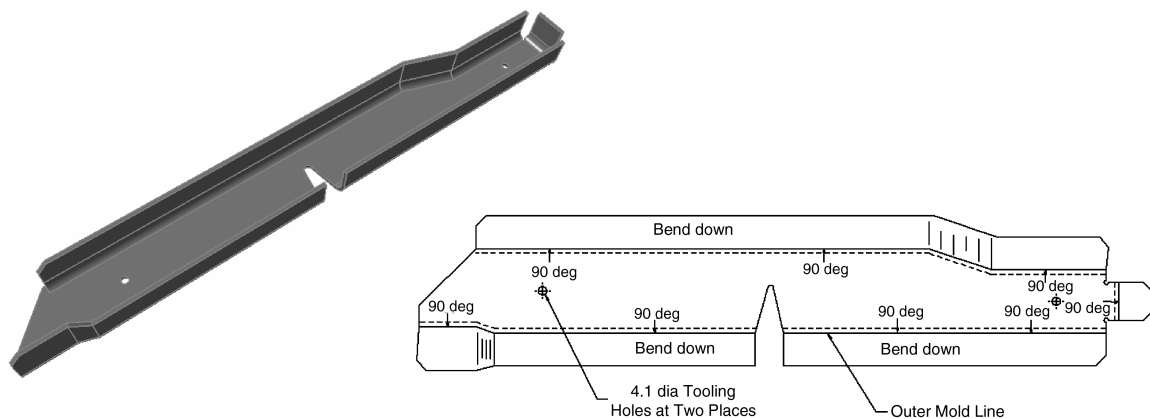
SMC features: PFS, tooling holes, bend up flanges, and cutout.
